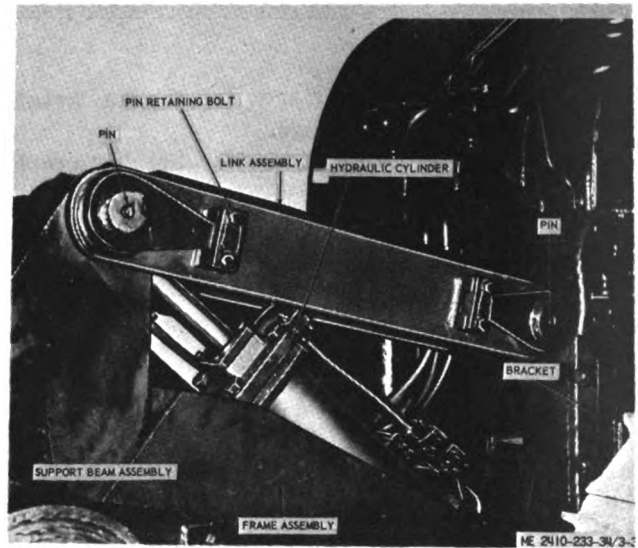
Hydraulic cylinder, link arm, and beam assembly, removal and installation.
